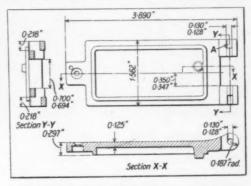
Plastics Moulded Cover so Designed that the Hinge Pin Holes can be Produced without the Need for Sliding Cores
